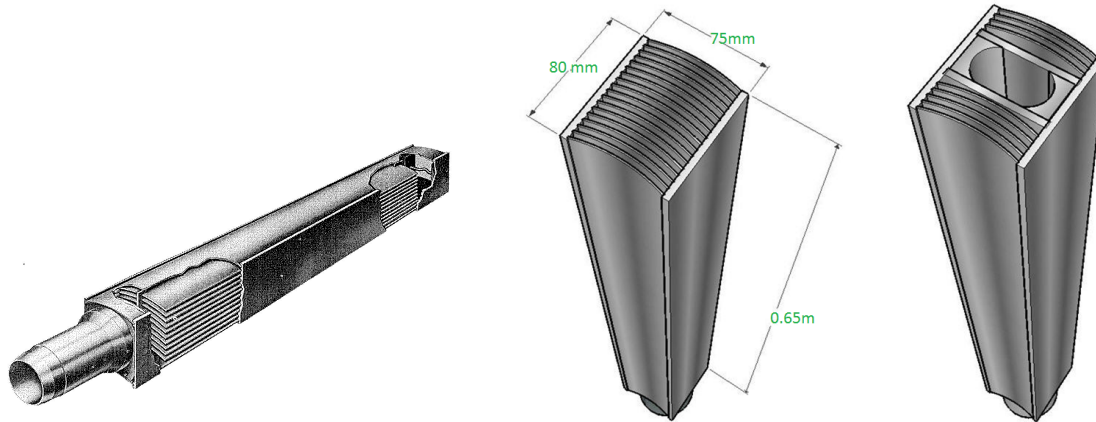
(L) Profile cutaway view of fuel assembly showing cylindrical bottom end fitting; (C) top view of standard fuel assembly; (R) top view of control fuel assembly with guide tube for control rod.
